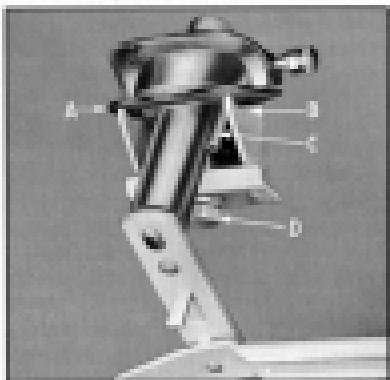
Windshield Wiper Transmission Details, '76 and '80 Series.
